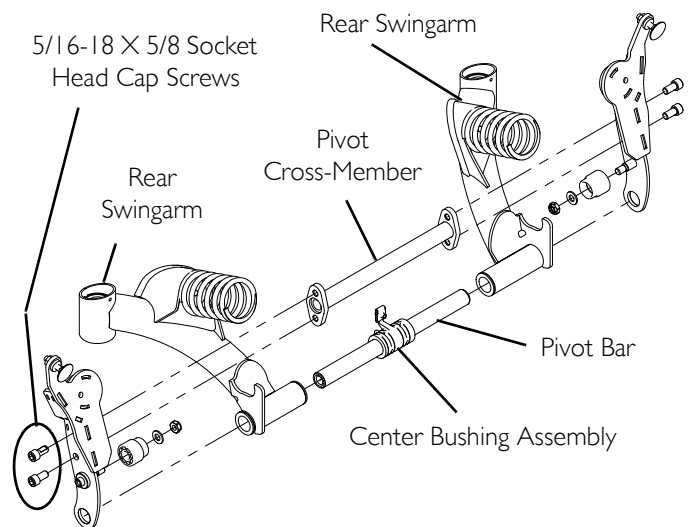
Disassembling/Assembling the Rear Suspension Frame
